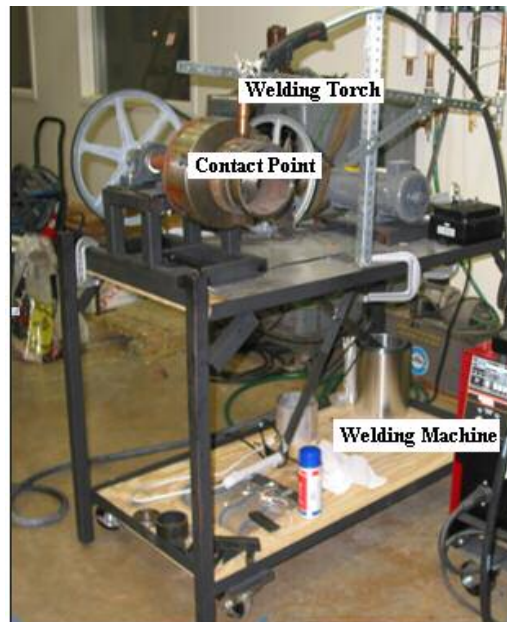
View of the complete pipe welding machine as positioned on a steel cart
